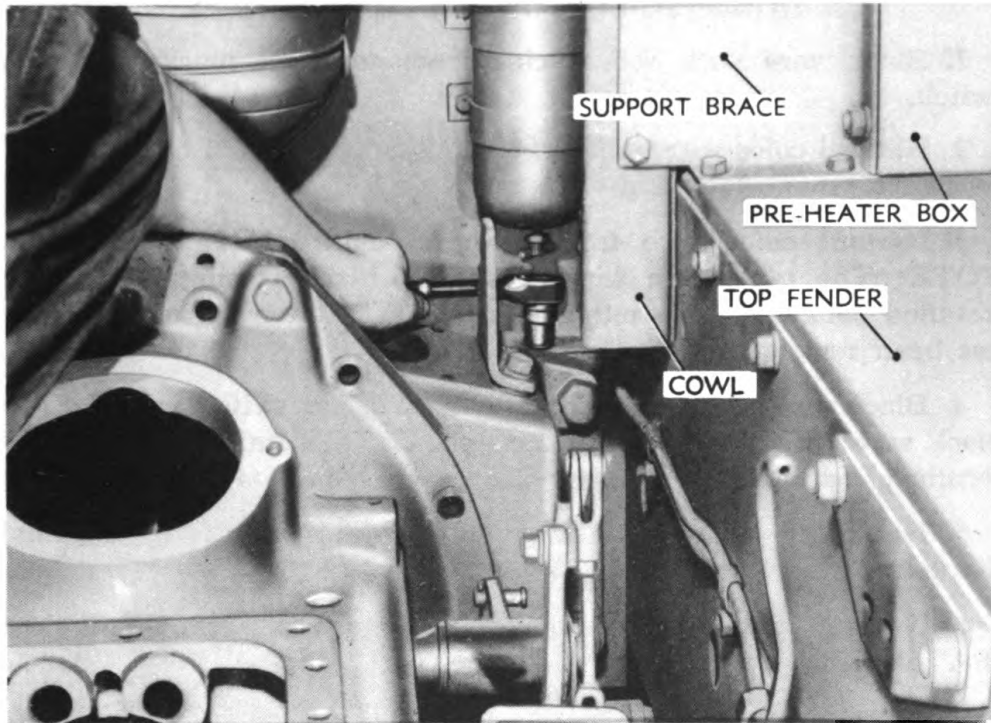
Removing Bolts Holding Battery Box to Cowl
